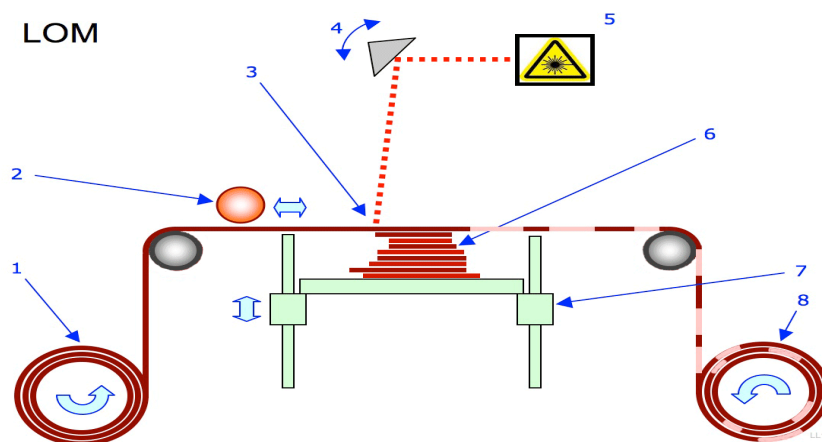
Laminated object manufacturing: 1 Foil supply. 2 Heated roller. 3 Laser beam. 4. Scanning prism. 5 Laser unit. 6 Layers. 7 Moving platform. 8 Waste. [23]
